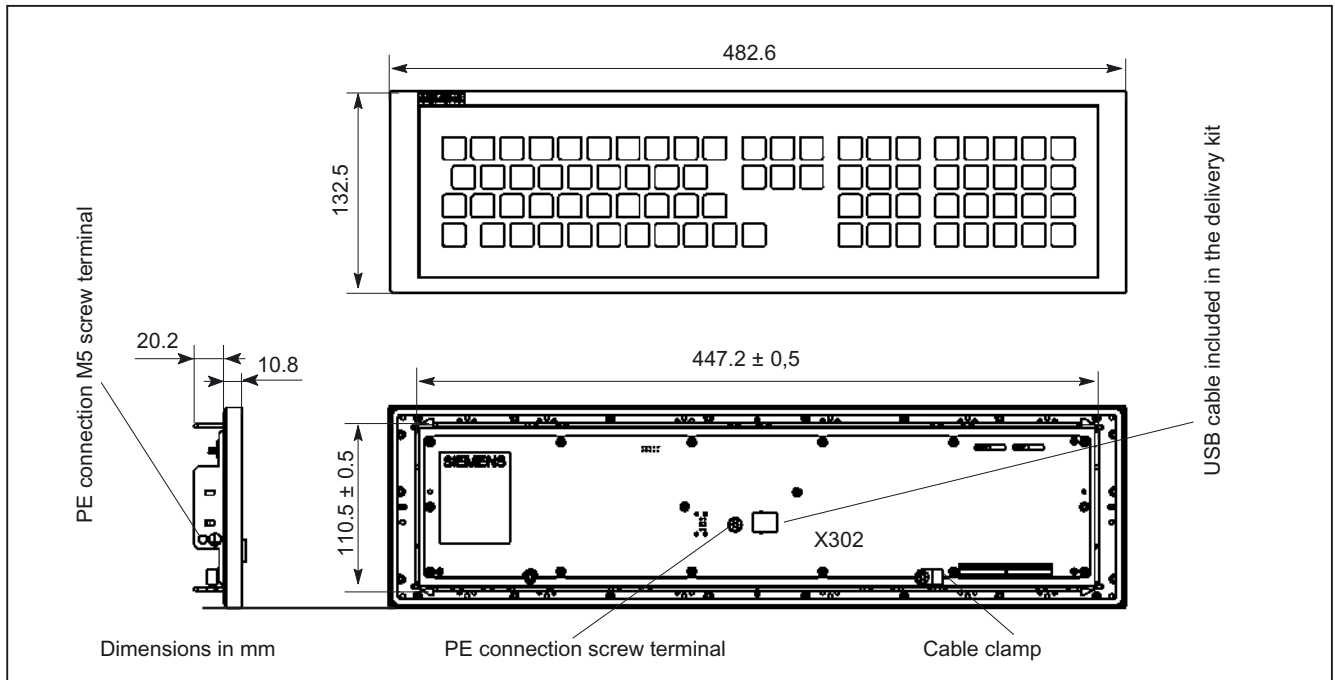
Front, side and rear views of CNC full keyboard KB 483C
